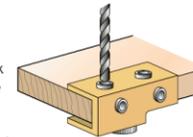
A drilling jig that has been clamped to the corner of the workpiece to get the holes in the correct place
